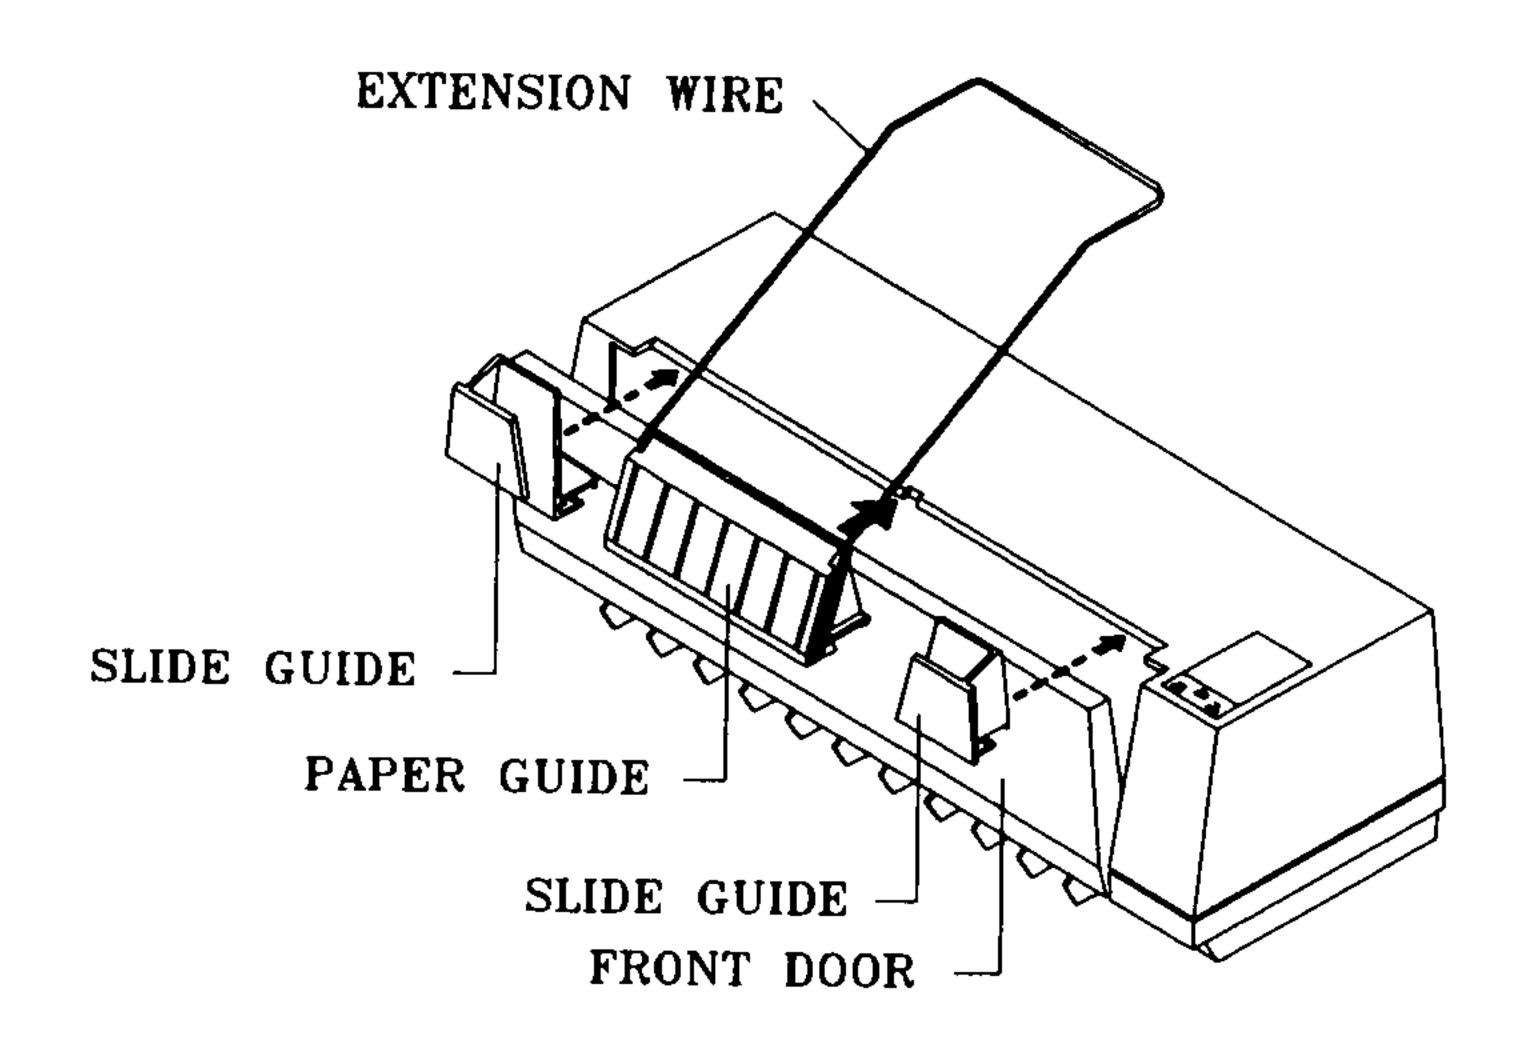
Installation for slide guides, paper guide and extension wire.
